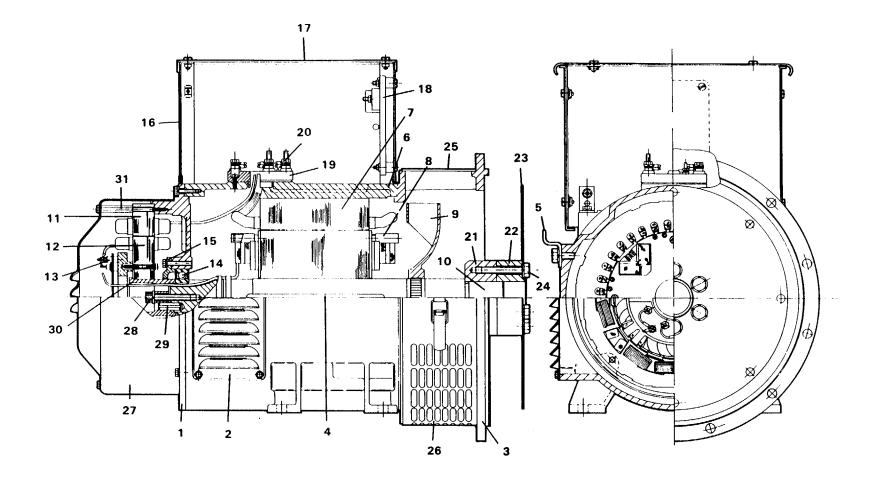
PC1 SINGLE BEARING MACHINE (OUTBOARD EXCITER)
